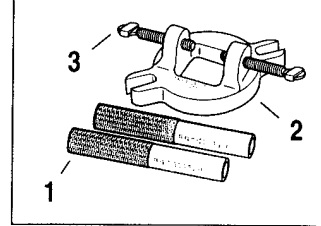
Connecting Rod Clamping Tool (Part No. HD-95952-33C)
